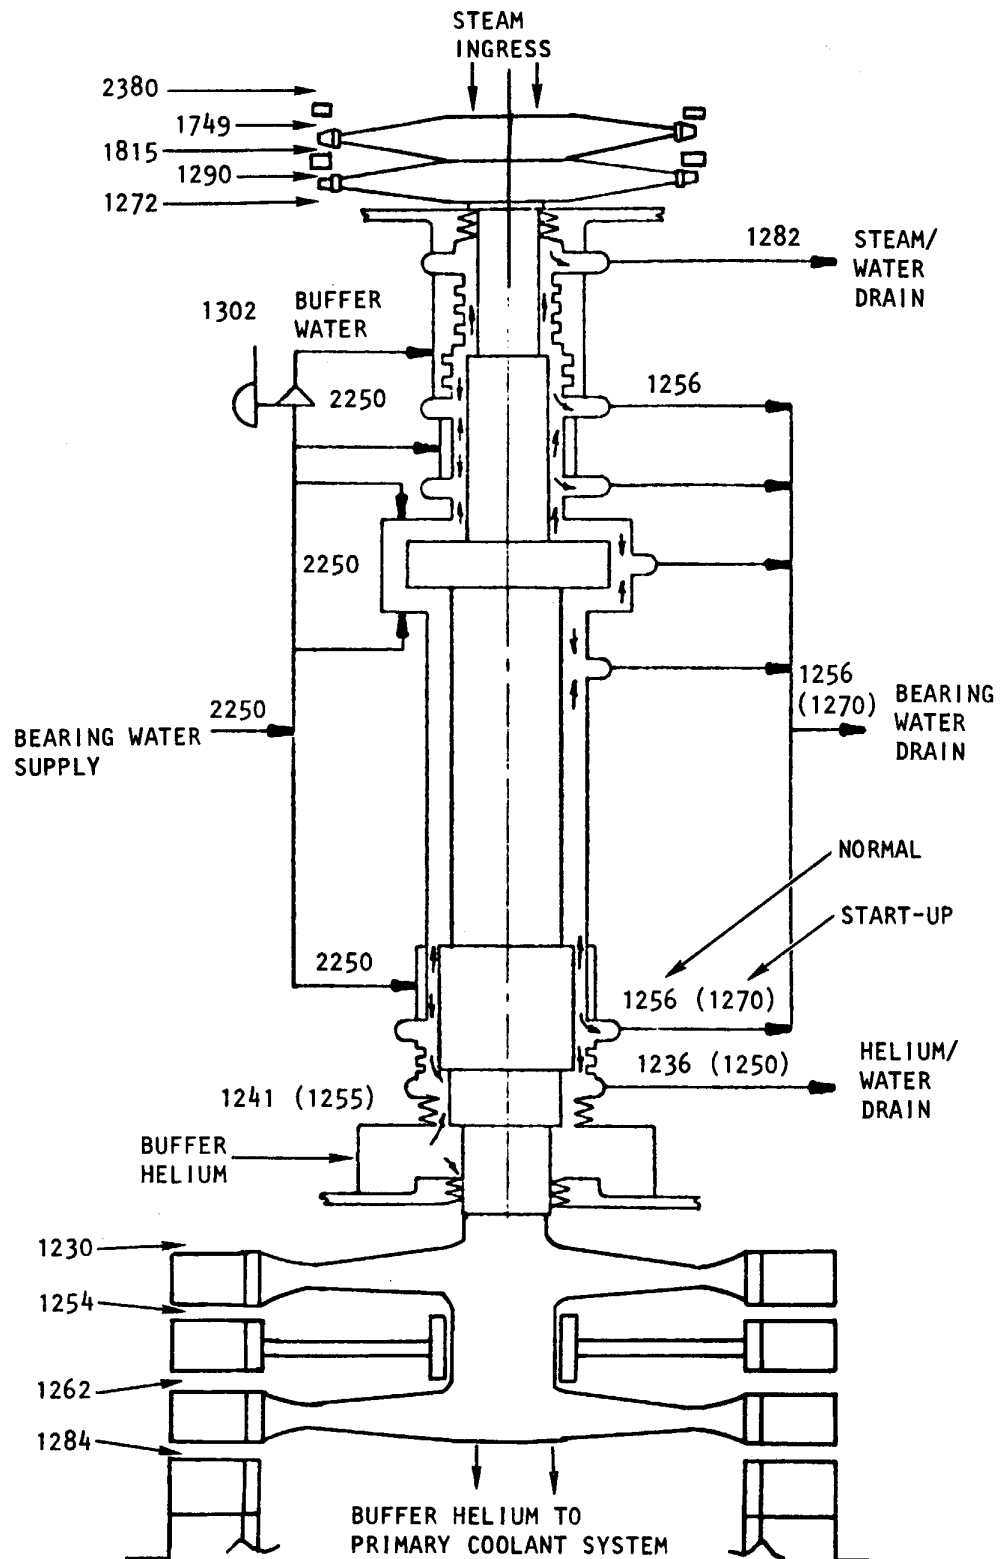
Circulator bearing system pressures (psi or 1/6900 Pa)
